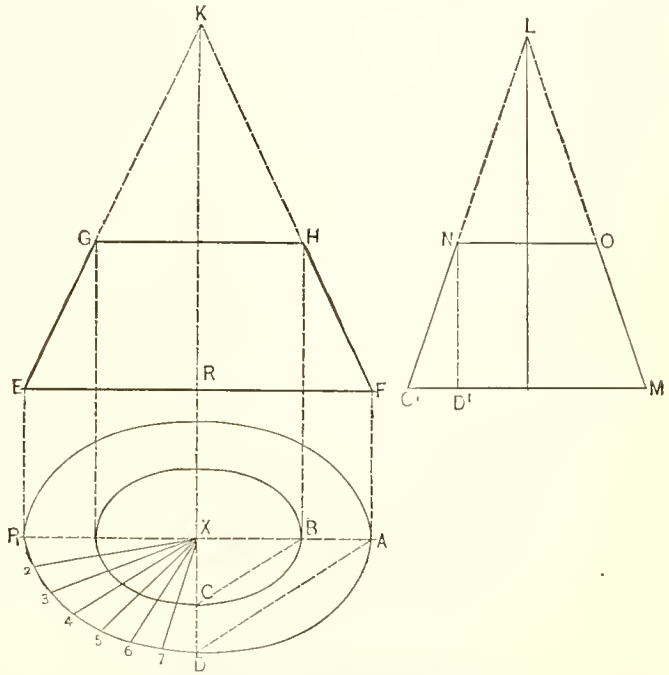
Side Elevation, End Elevation and Plan of the Frustum shown in the Preceding Figure.
